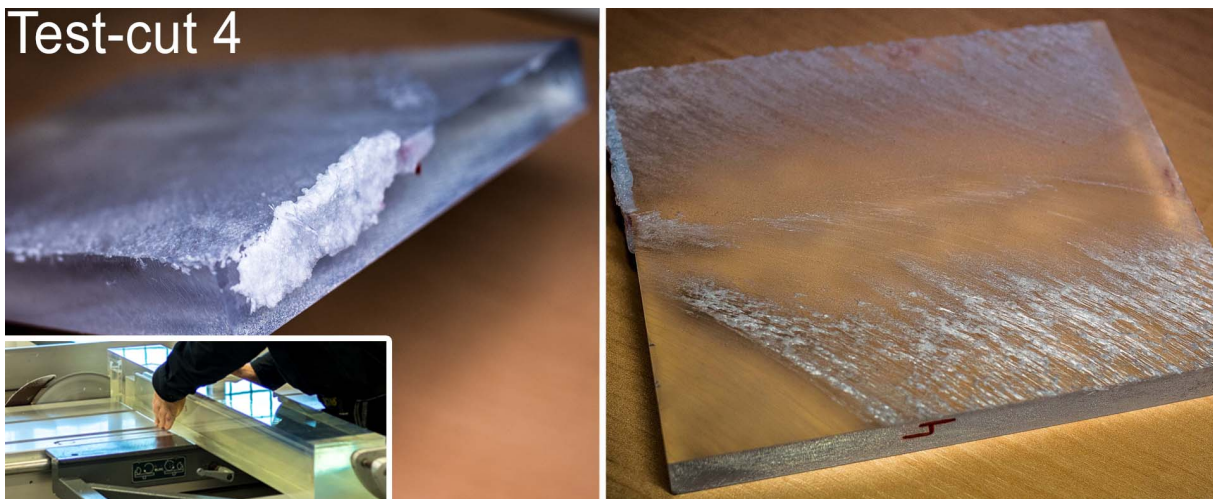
Scintillator Test-cut 4, performed using an Industrial table saw with a carbide-tip blade. (Left panel) the cut-off piece and (right panel) a close-up of the surface finish for Test-cut 4 is shown. An image of the saw used to perform this cut is included in the bottom left panel corner.
